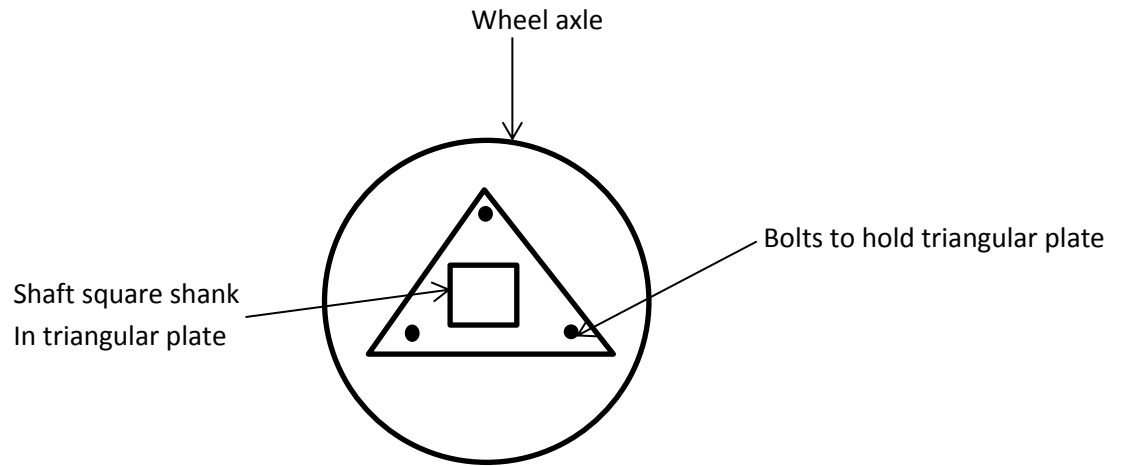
Front view of triangular plate connected to DE locomotive wheel axle (Final design)
